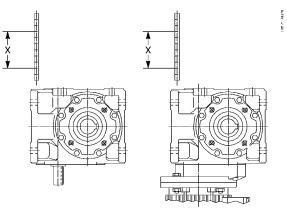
Position the gear reducer or gearmotor in mounting position B7 for oil (quantity) level measurement.
